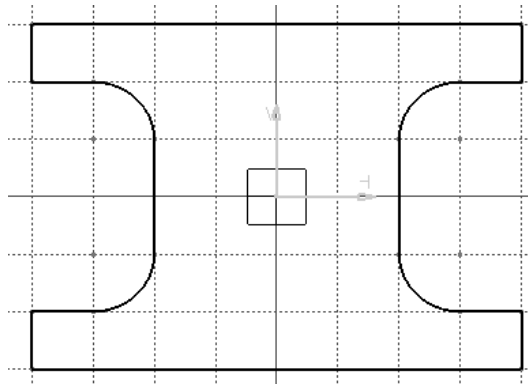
The sketch after drawing the outer loop and hiding the constraints
